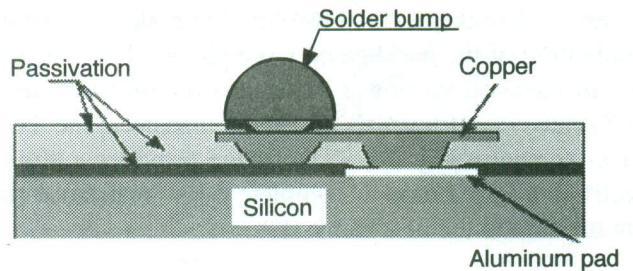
Placement of a solder bump directly on a chip to facilitate direct attachment to a PCB.
